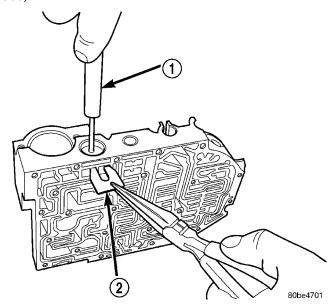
Remove Regulator Valve Spring Retainer using Tool 6302
